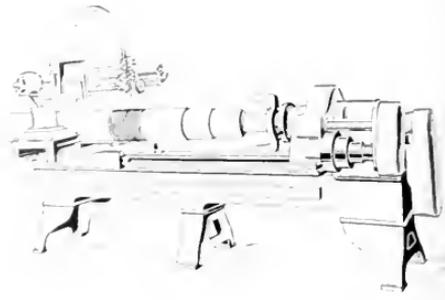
Depositing Spiral Weld by Means of Lathe
